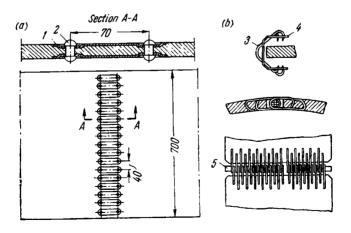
Conveyor belt joints: a-joint with riveted steel straps; b-joint with whre hooks
